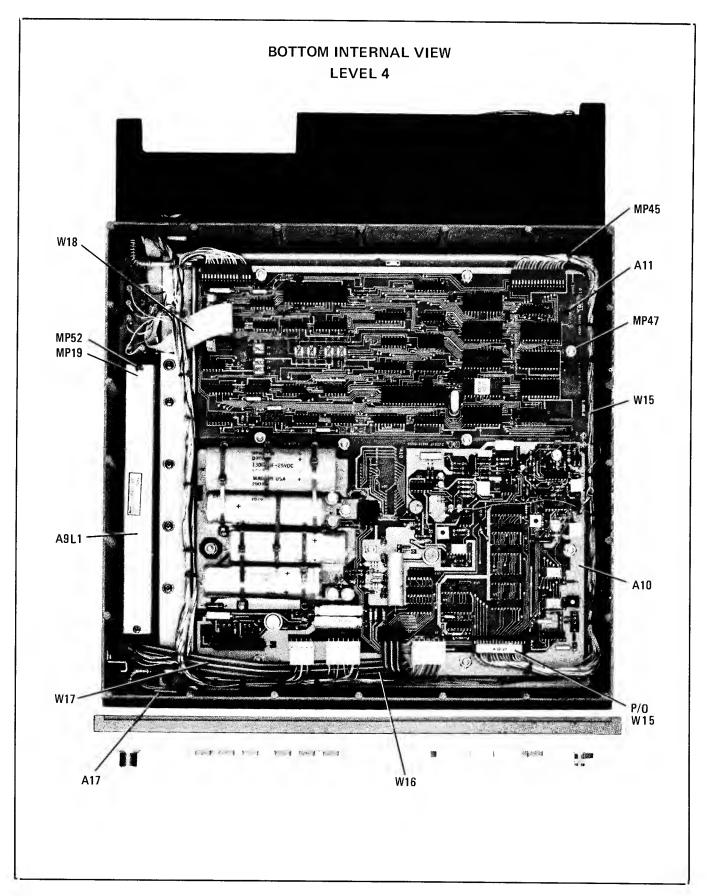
Bottom Internal View; Bottom Cover Removed
